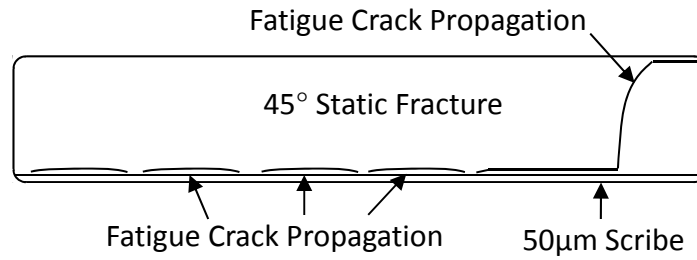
Illustration of fatigue crack development on fracture surface of 50 μm deep scribed sample with MIC peening treatment
